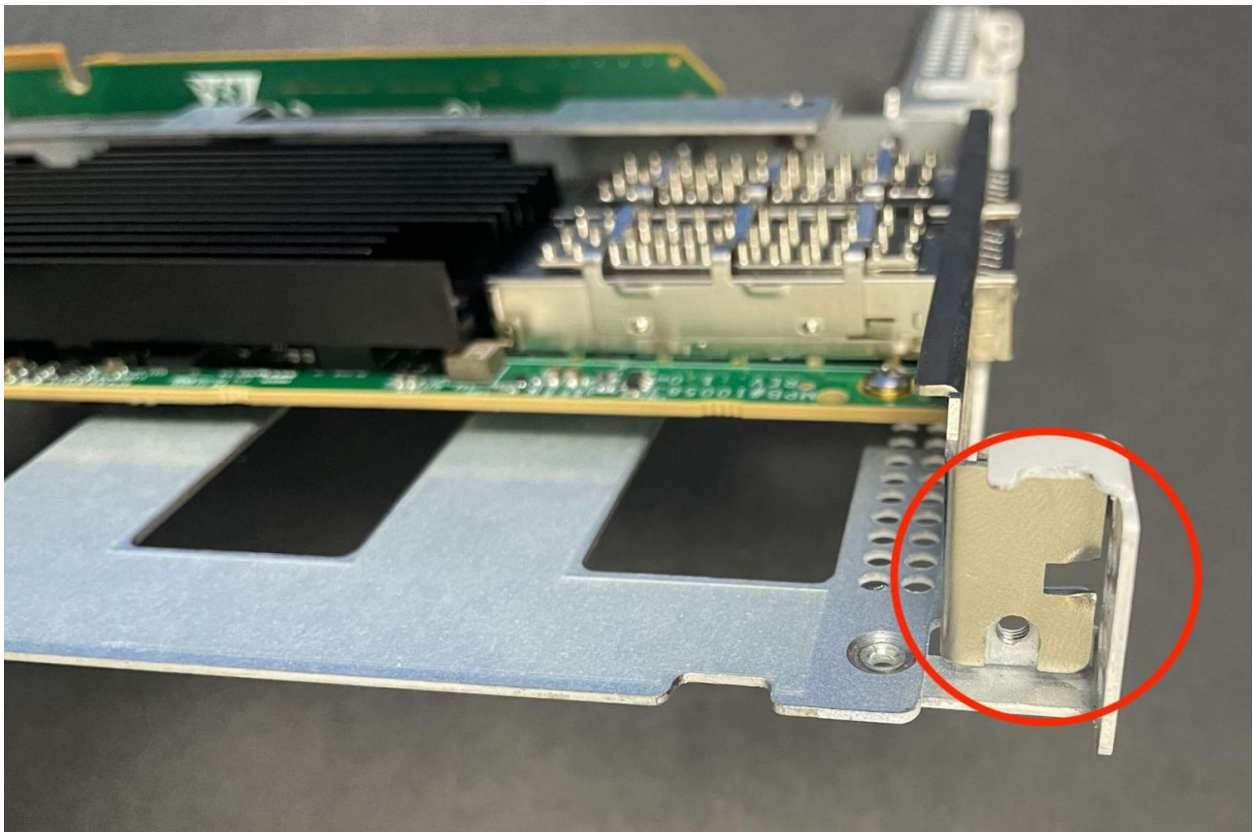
Expansion card aligned with the riser assembly and retention screw hole
